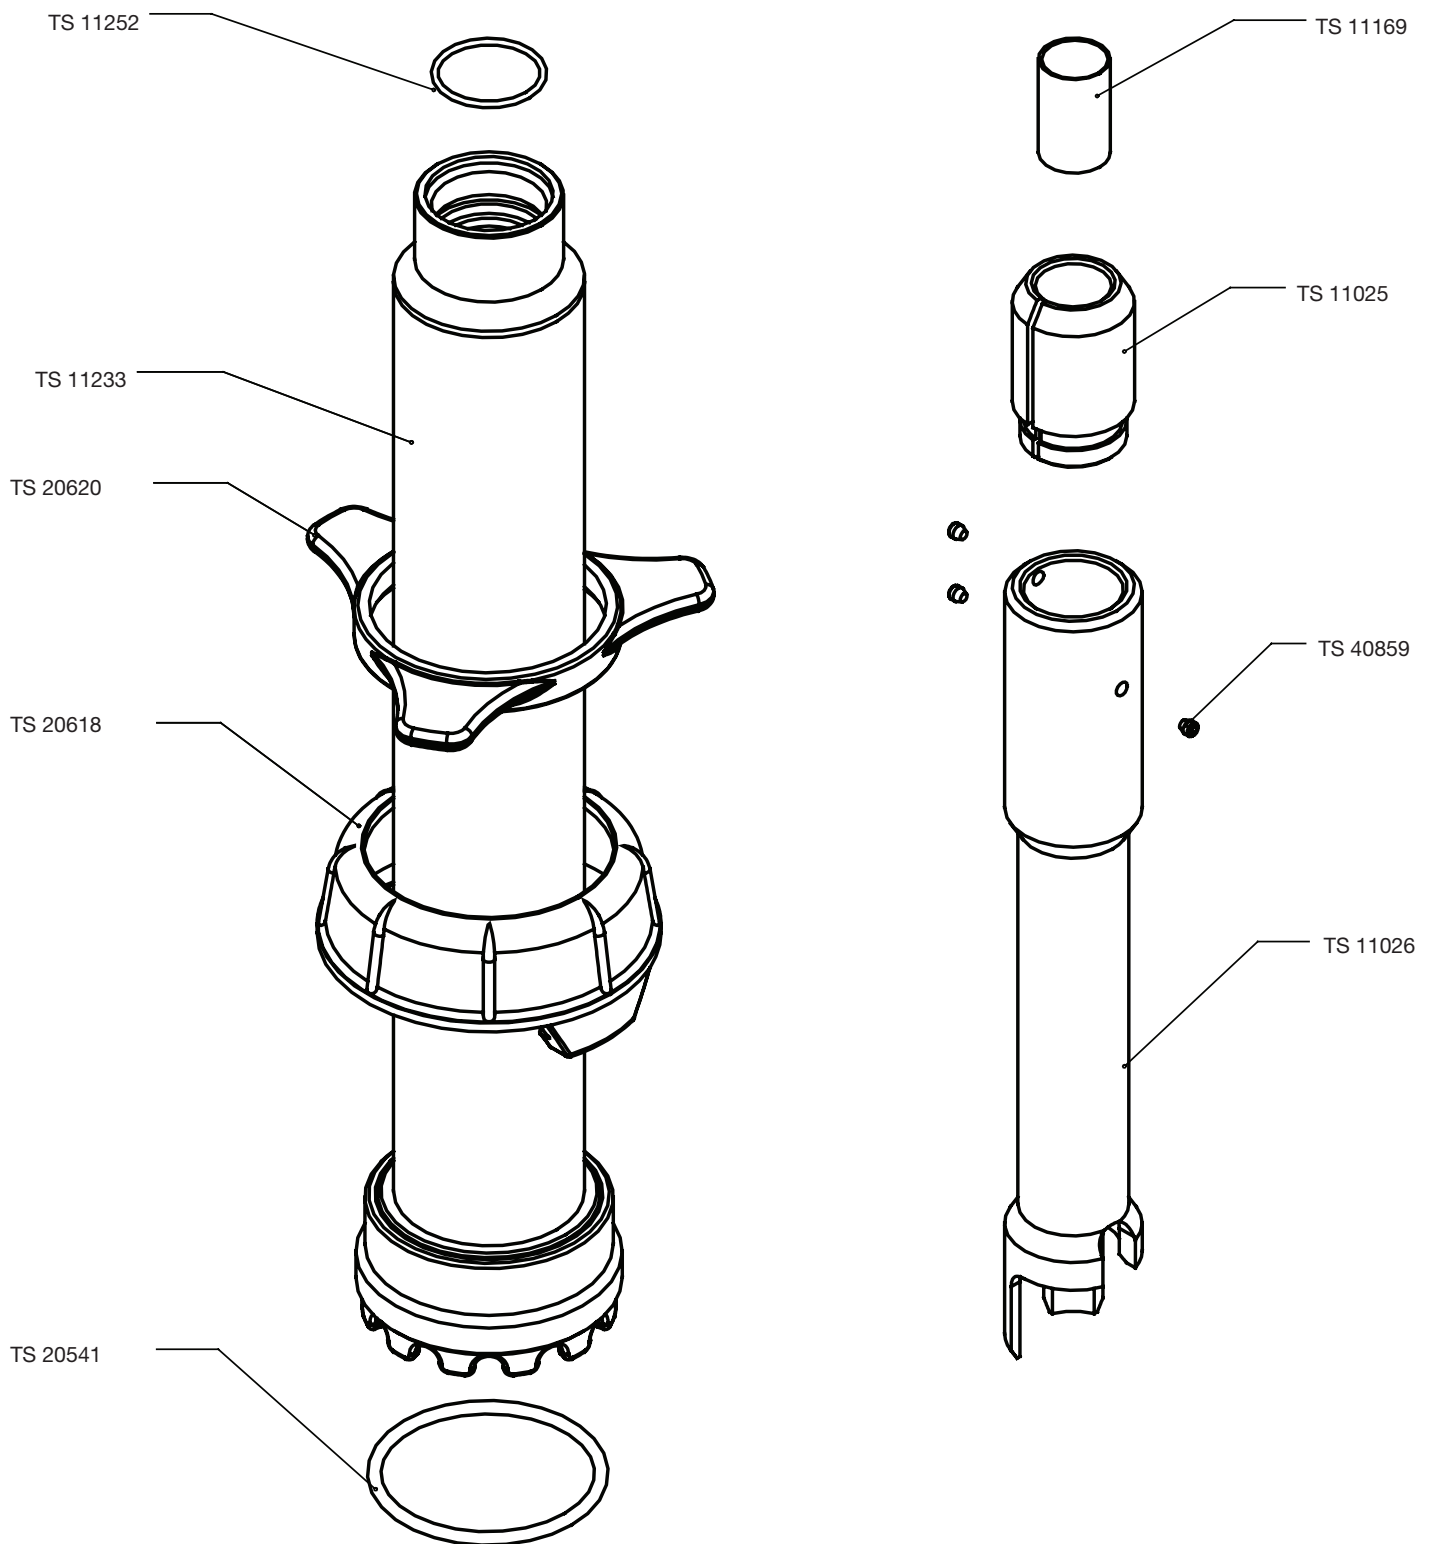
storage tube SS2-Q2 with load TS 10182, details
